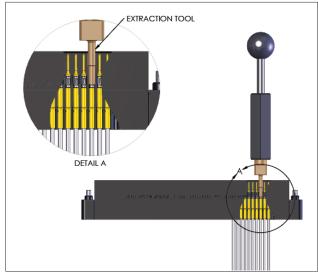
Figure B. Ensure that the tool is kept perpendicular to the module face to avoid damage to the contact or tool.
